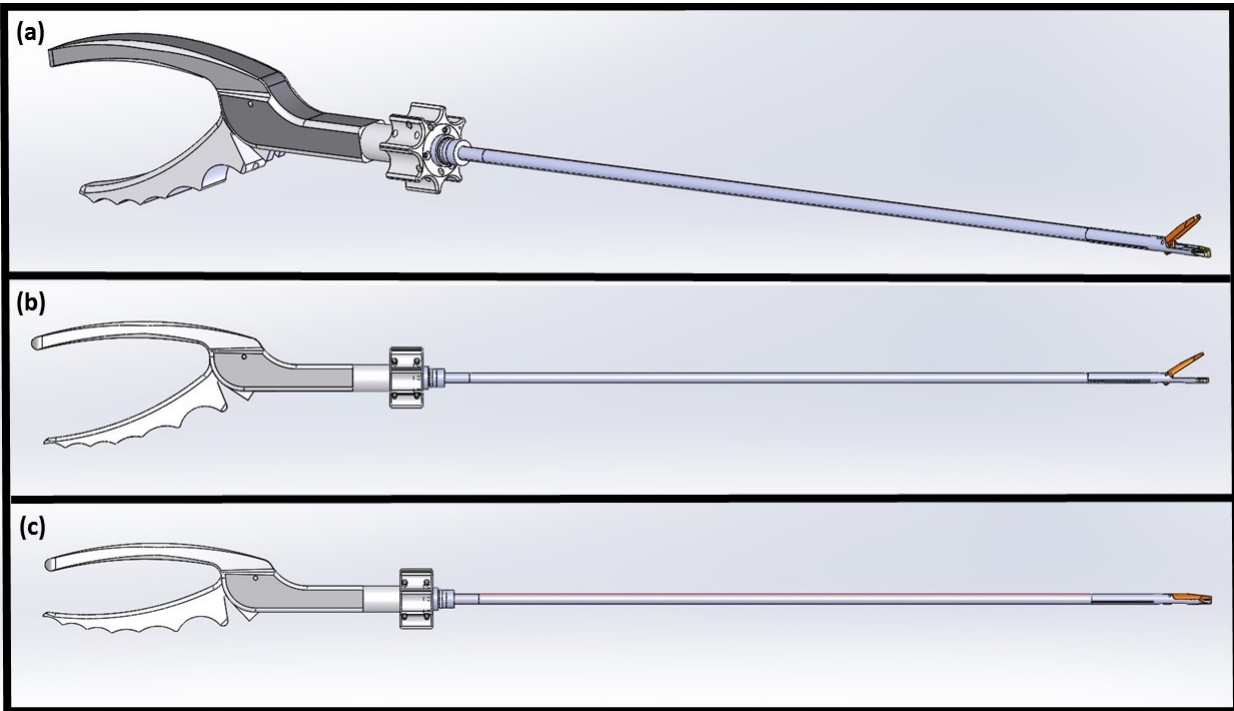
a) CAD model of the sensorized laparoscopic needle-driver; b) Side view of the instrument with an open jaw; c) Side view of the instrument with a closed jaw.
